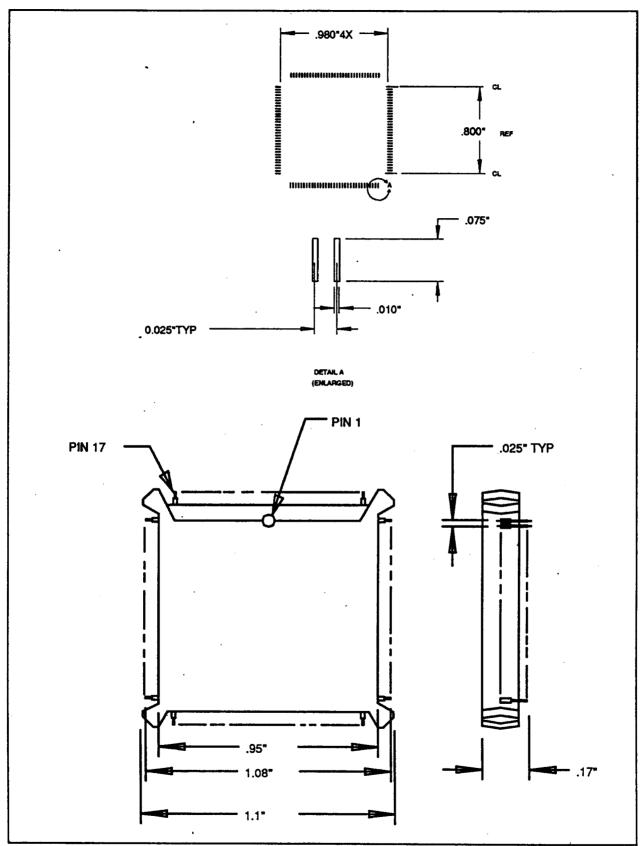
132-Pin JEDEC Flat Pack Packaging Diagram
